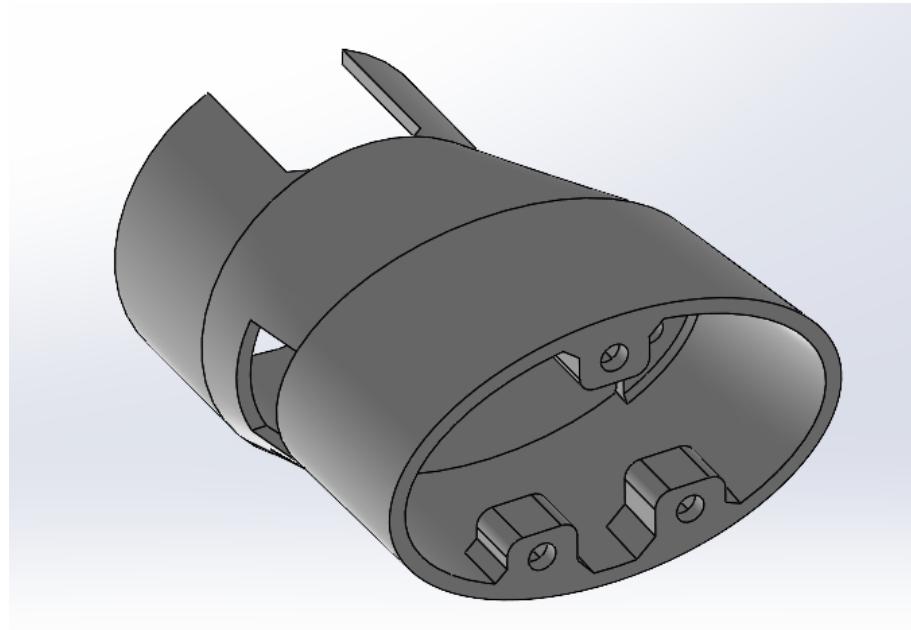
Forearm Redesign to Fit Wrist and Bolts
